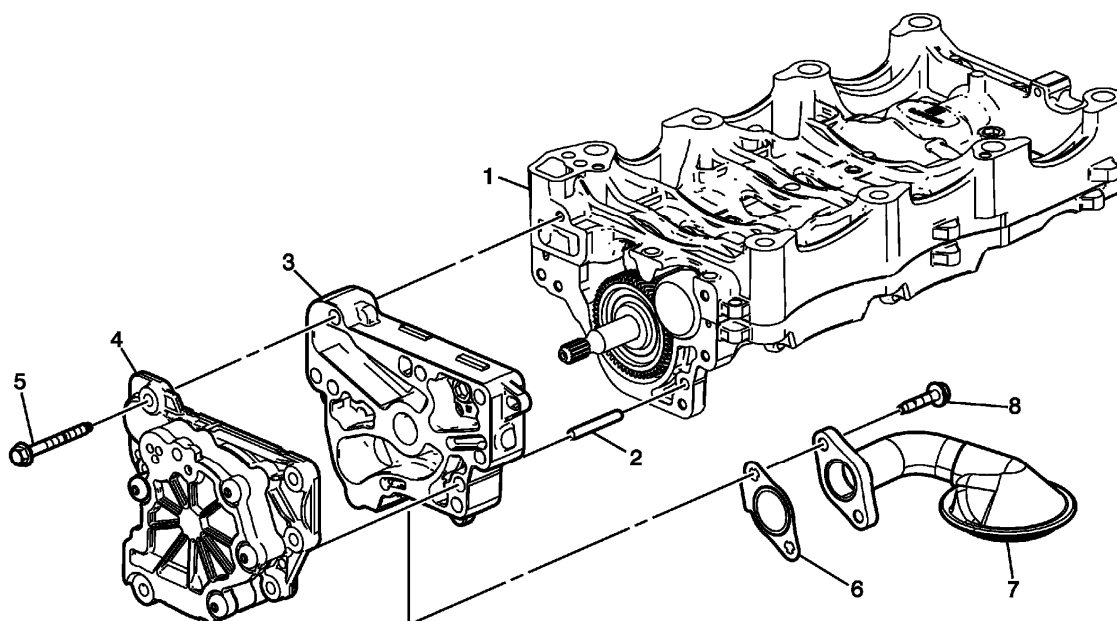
Balancer Shaft Module, Oil Pump Locating Pin And Oil Pump Assembly
